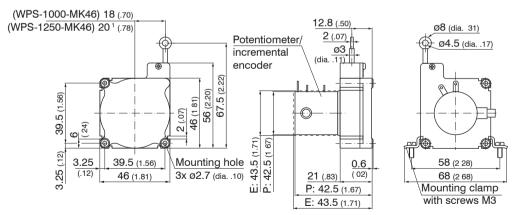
Dimensional drawing WPS- ... -MK46, with potentiometer or encoder, dimensions in mm (inches), not to scale
